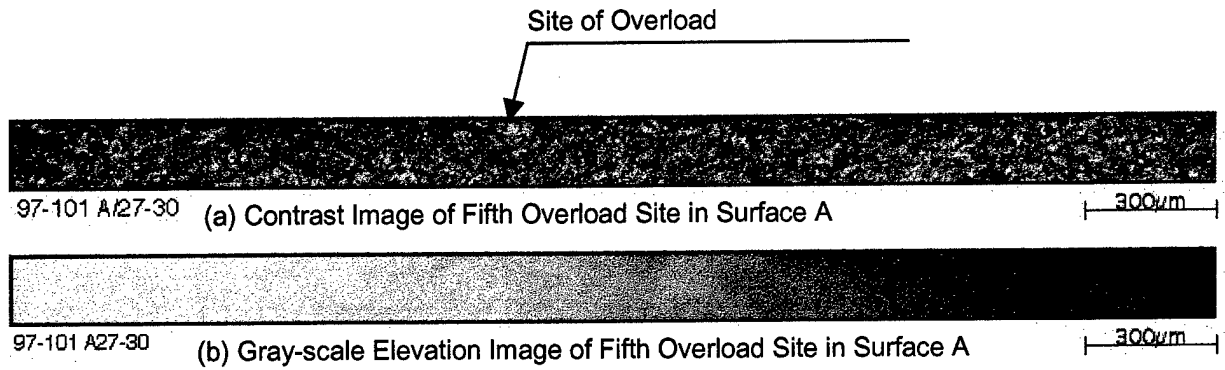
Contrast and gray-scale elevation images of fracture surface area surrounding overload site.
